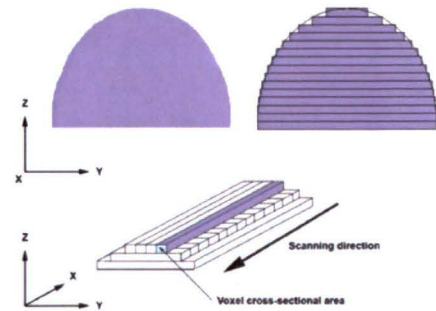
Cross-sectional area from CAD interpreted by 3D printer
